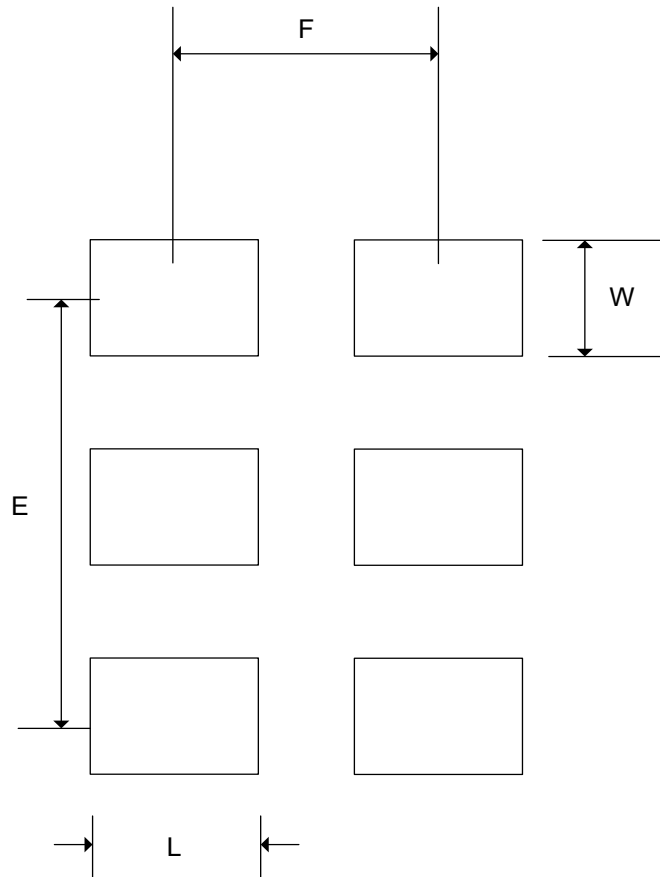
MS1180 Packaging Land Pattern Drawing (2.0X1.6 mm)
